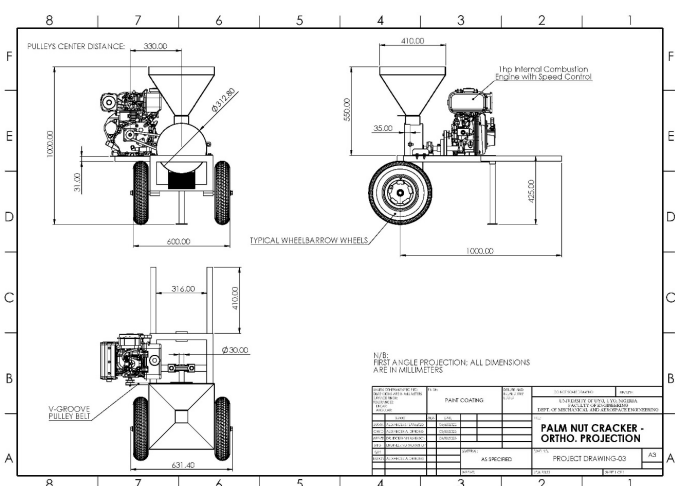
Orthographic drawing the palm kernel nut cracking machine
